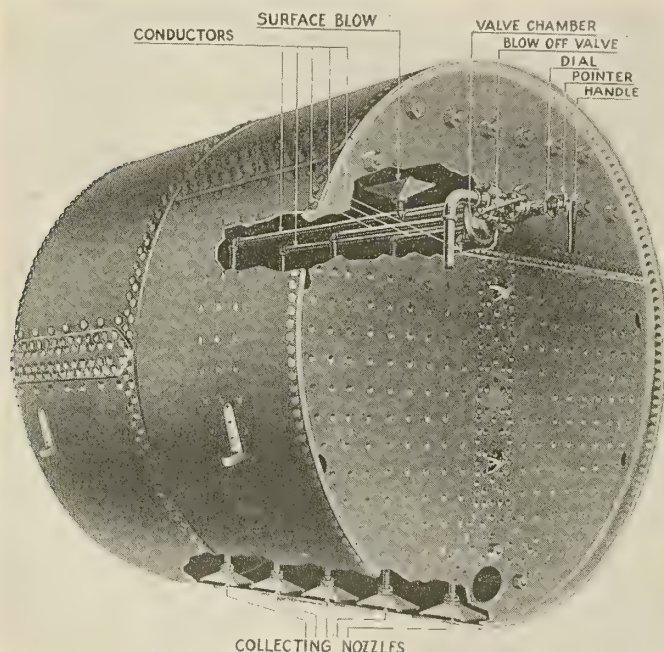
Showing Installation of Geyser System in a Scotch Boiler
